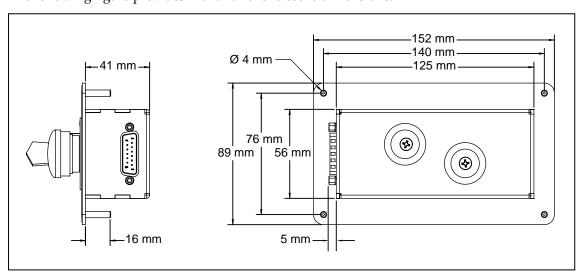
Front Panel Dimensions (Rear and Side Views)
